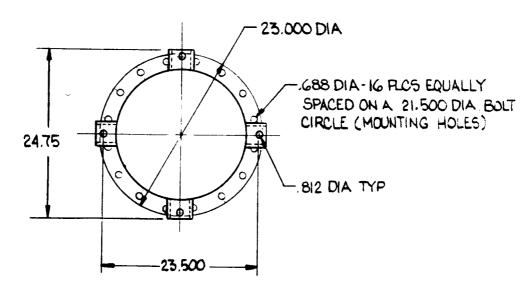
SENTINEL 25F EXTERNAL DIMENSIONS (IN INCHES)
